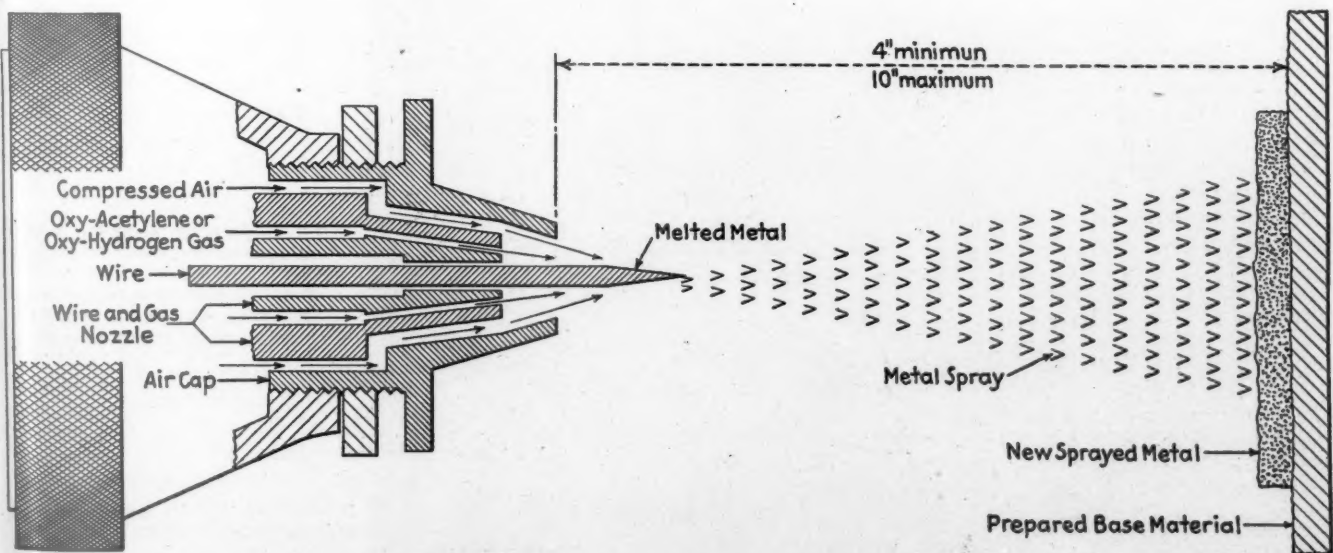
Cross-section of the wire nozzle and air gap of a metal-spray gun
